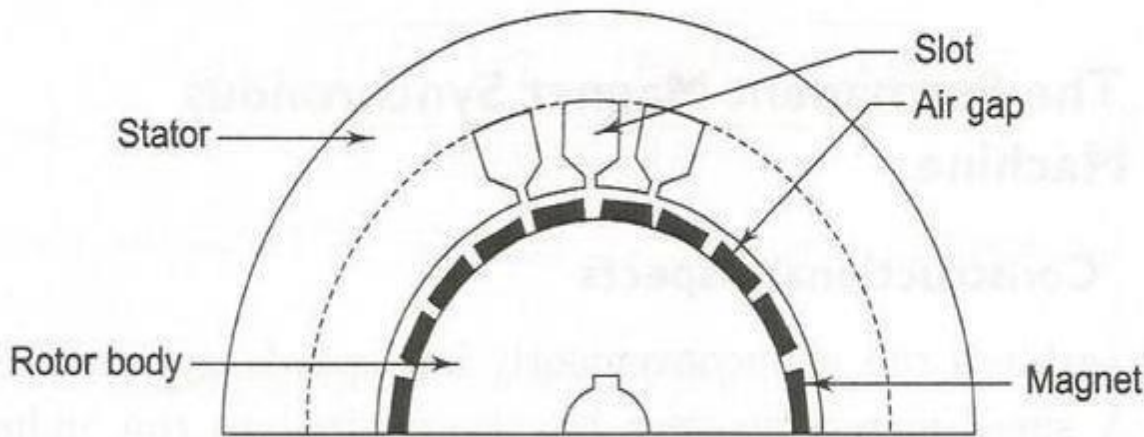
Cross sectional view of a Surface mounted PM Machine
